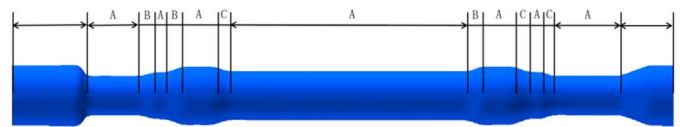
Finite Element model of three-roll skew rolled hollow axle
